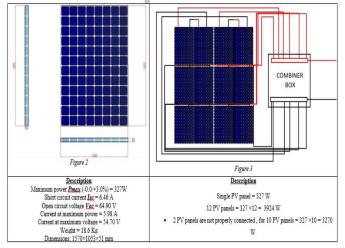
Multi View drawing of Single photovoltaic panel with dimensions and descriptions
